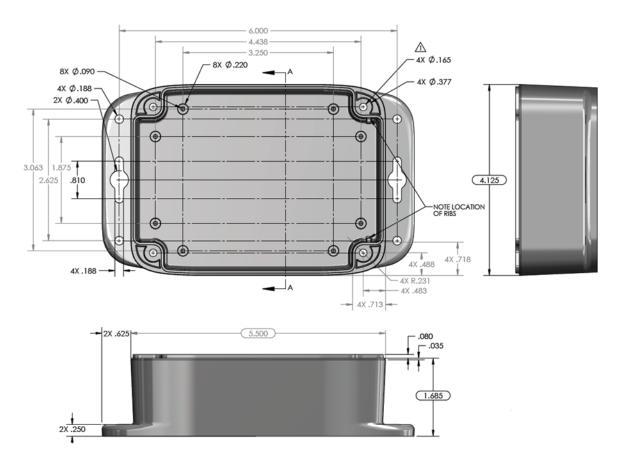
Wireless transceiver dimensions for wireless level meter. All measurements are in inch.
